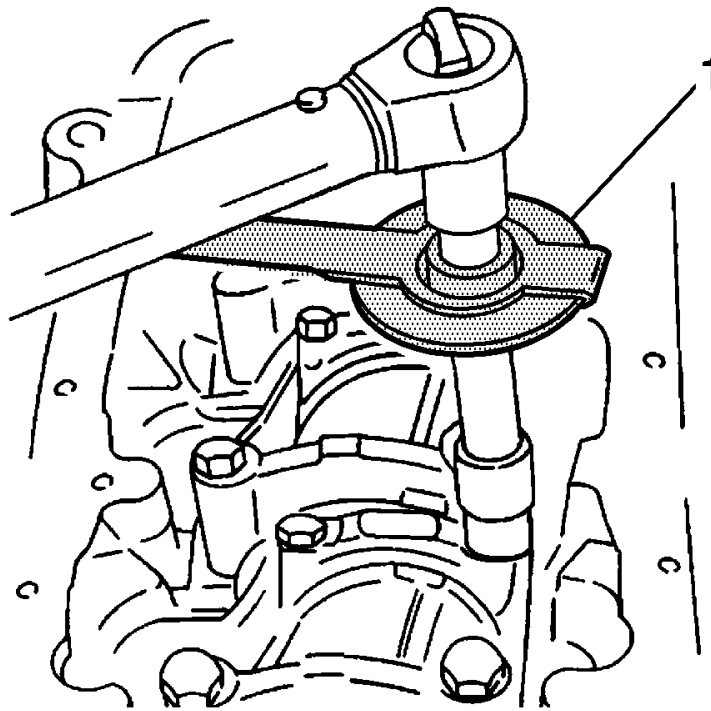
Using J 45059 Or KM-470-B To Torque Rod Bolts
